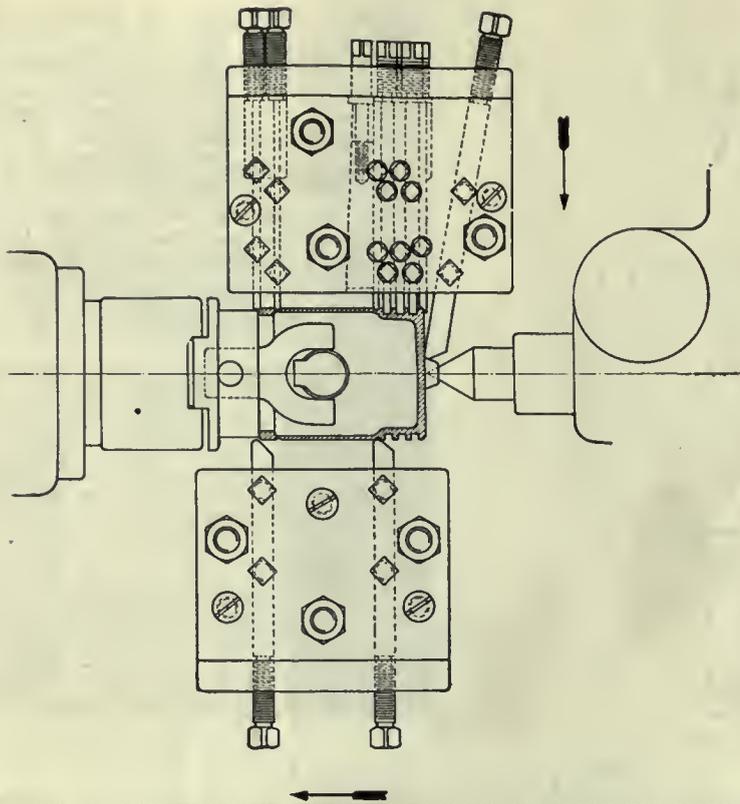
ROUGHING AND FINISHING TOOLING ON ALUMINUM PISTONS.
